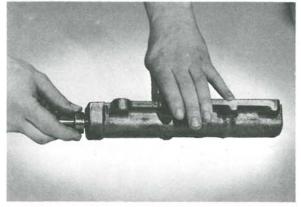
Apply a light coat of Permatex #2 to the outer diameter of the valve spool oil seal. Install with lip of sear in.
